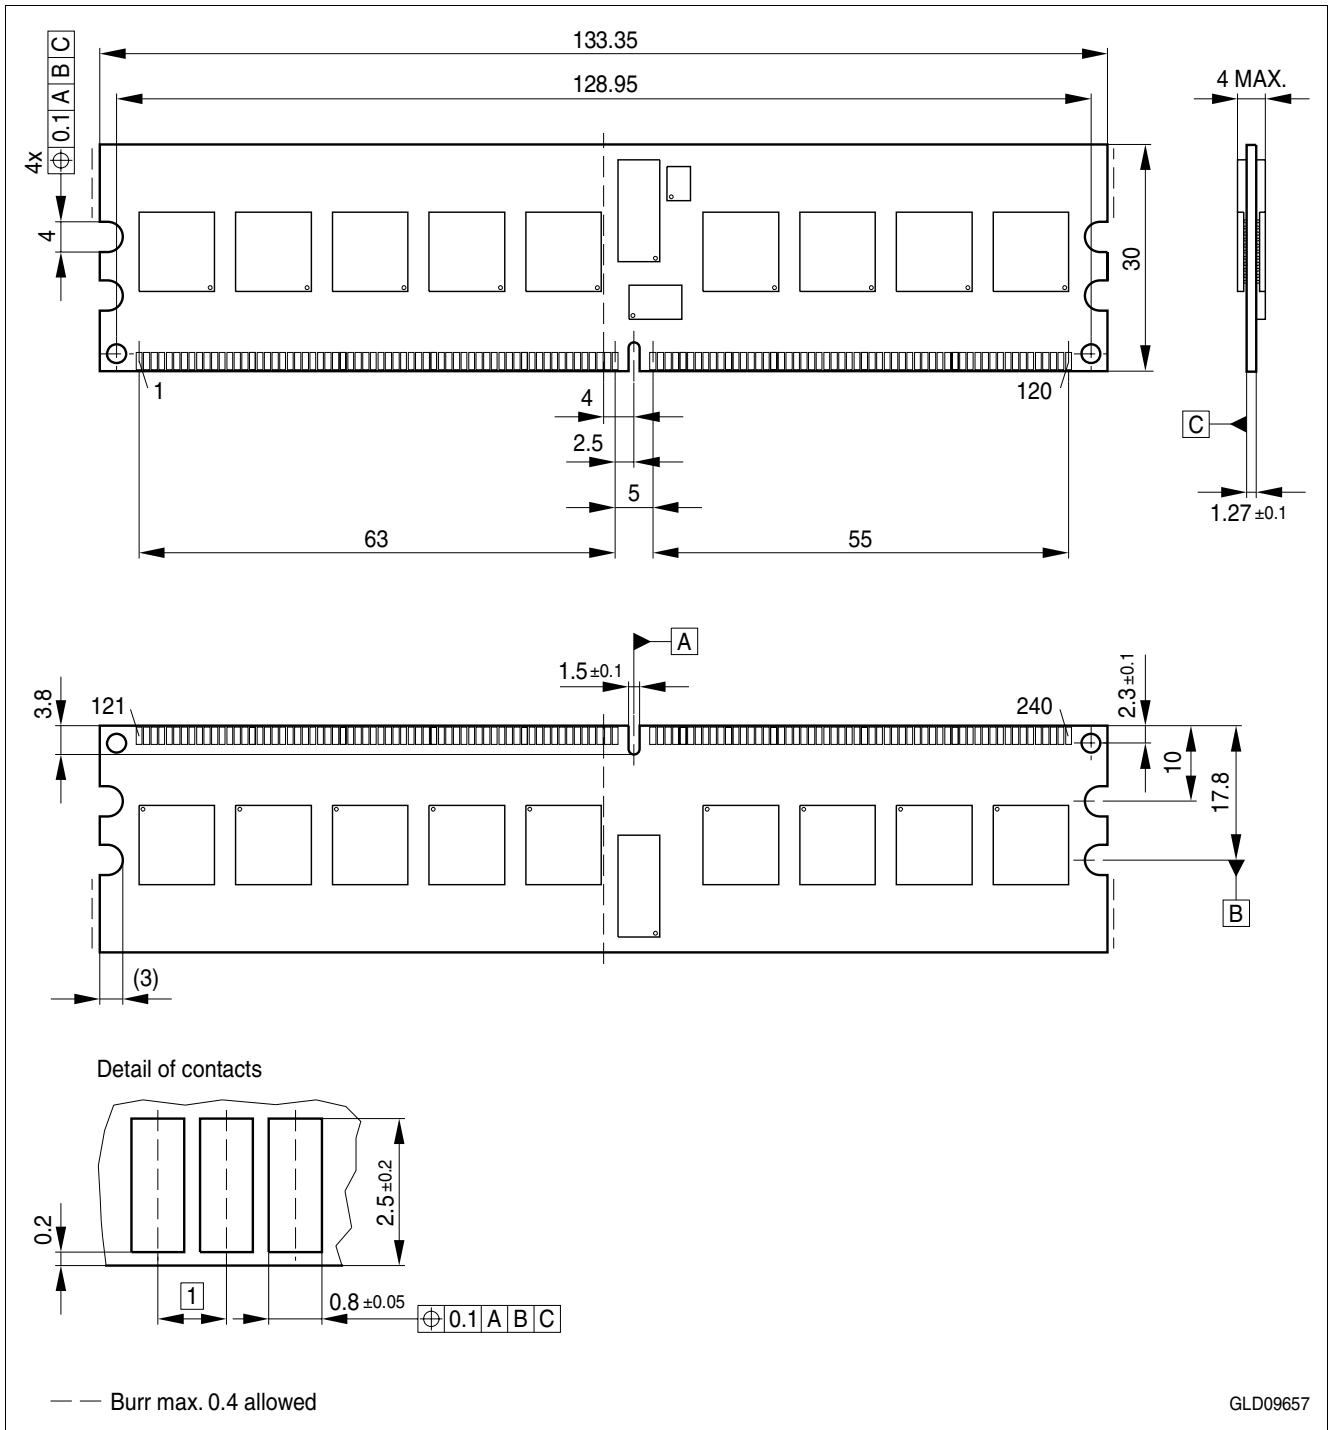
Package Outline Raw Card C-H L-DIM-240-13
